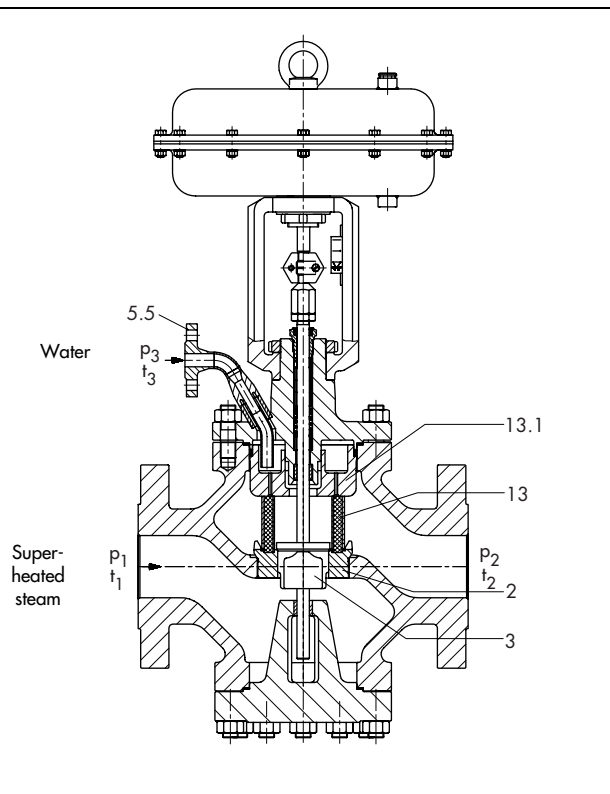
· Type 3284-1 Pneumatic Steam Converter with flanges, standard plug and Type 3271 Actuator
